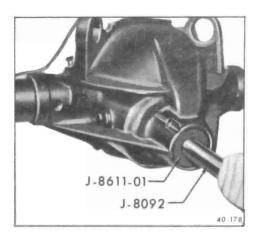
Installing Front Pinion Bearing Outer Race
